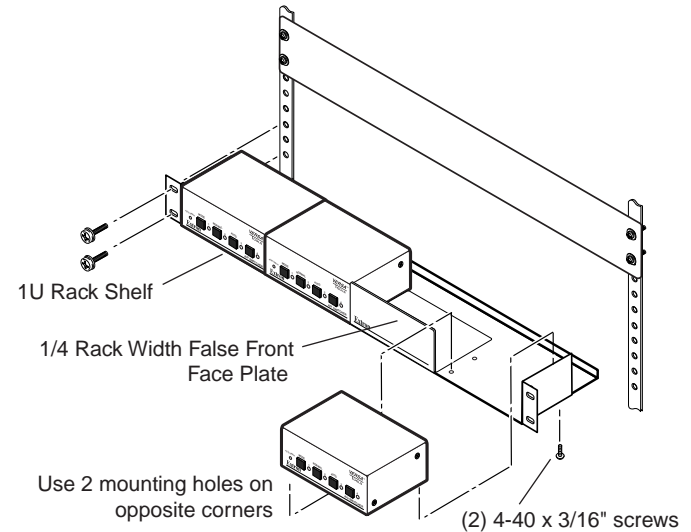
Mounting the MSW on a VersaTools rack shelf
